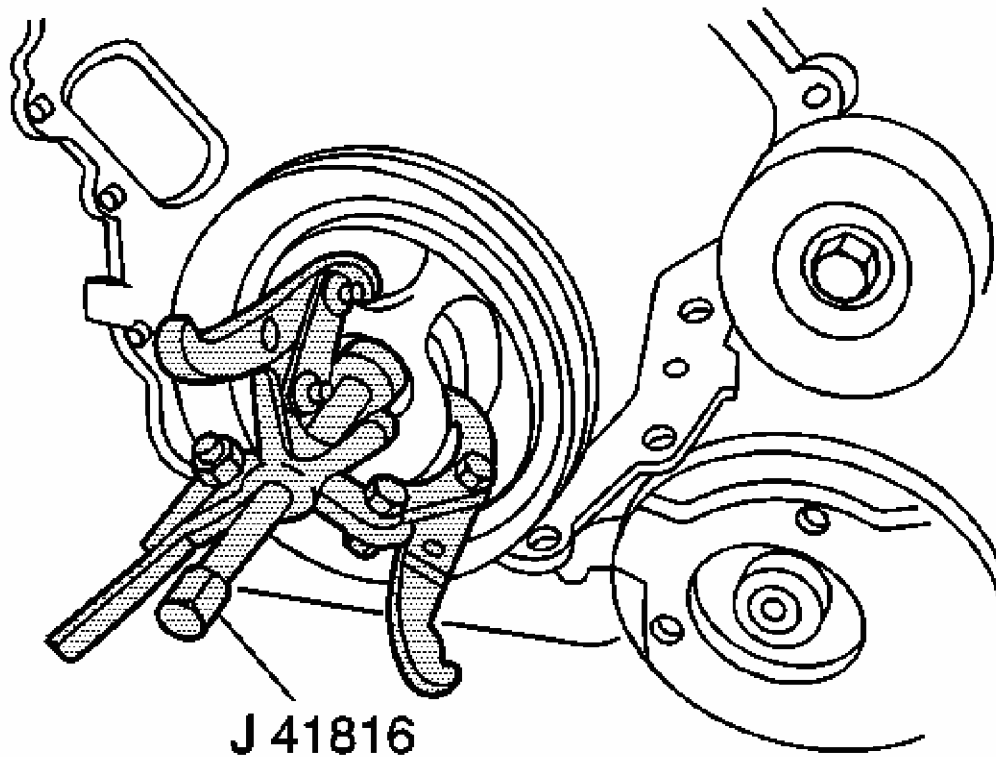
View of J 41816 Removing Crankshaft Balancer
